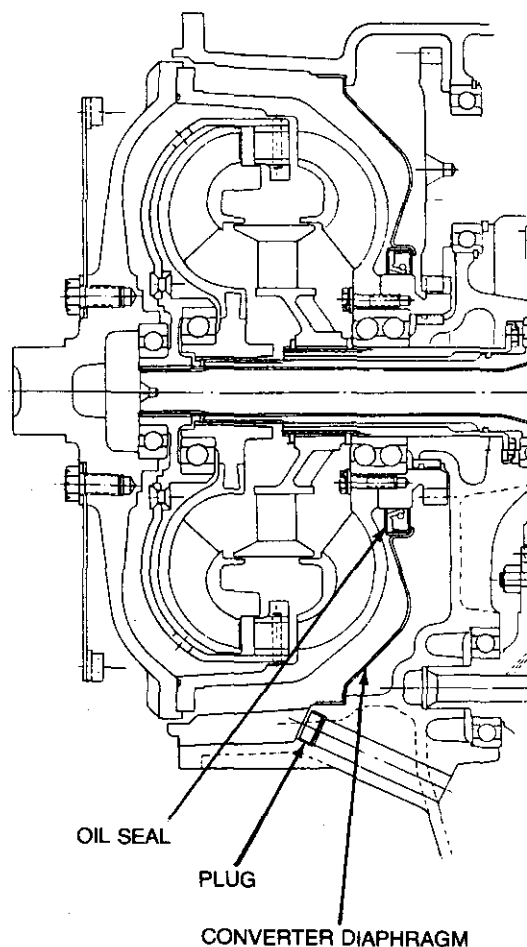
SAE engine-to-transmission adaptation for the dry housing
